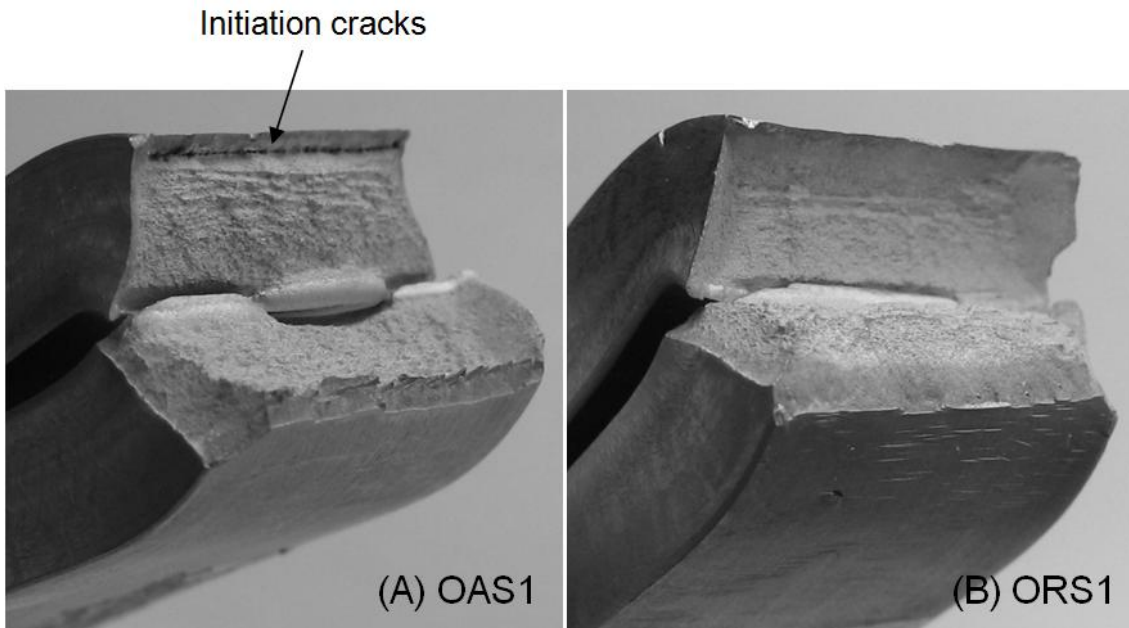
Fracture surfaces of samples OAS1 and ORS1 (FSP surface tensile loading). Overlapping by the AS (A) and RS (B).
